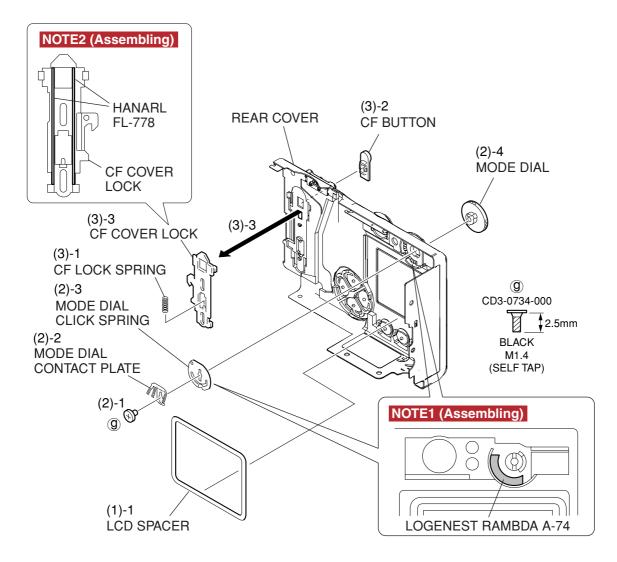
LCD SPACER, MODE DIAL, CF COVER LOCK
